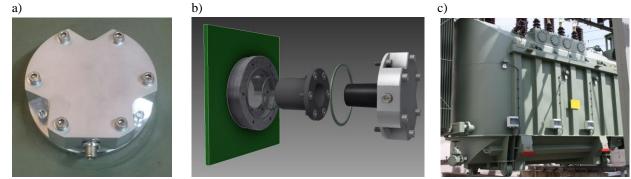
a) UHF plate sensor for direct installation at transformer tank wall [9] b) 3-dimensional drawing of welding ring (left), dielectric window with gasket (middle) and UHF plate sensor (right) [9] c) Test installation of UHF plate sensor prototypes at a power transformer
